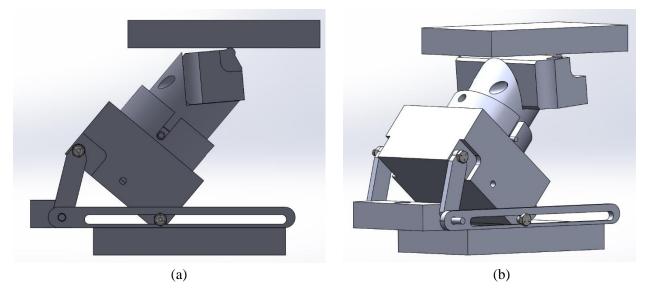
Side View (a) and Isometric View (b) of CAD Model of Slidometer Design 2
